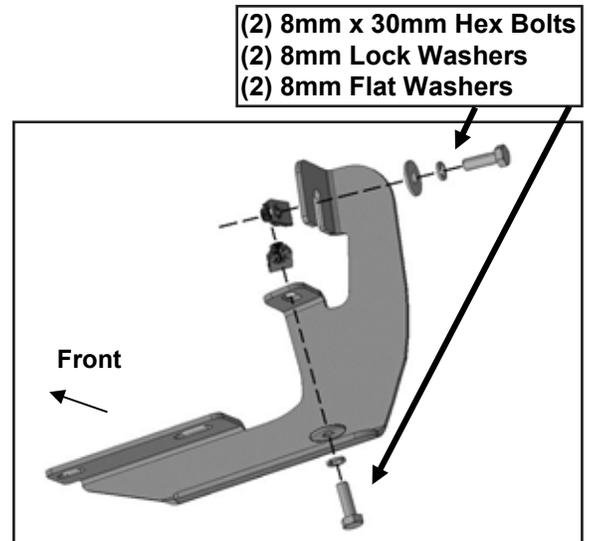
Passenger side mounting locations along bottom and back of body panel illustrated.
